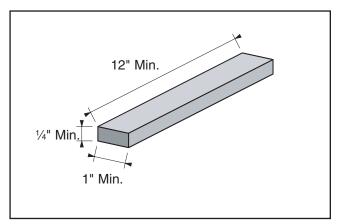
Minimum dimensions for edge jointing and surface planing (jointer).
